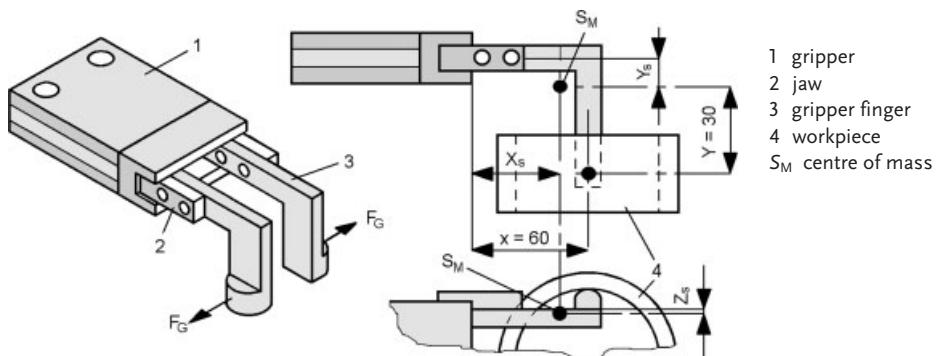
Parallel jaw gripper with eccentric gripping points
